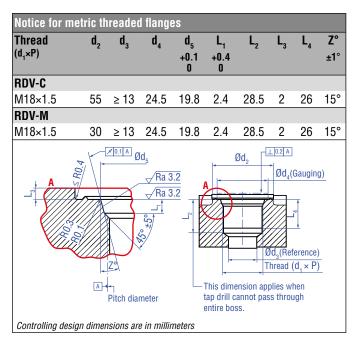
Notice for metric threaded flange M18×1.5-6g based on DIN ISO 6149-1
